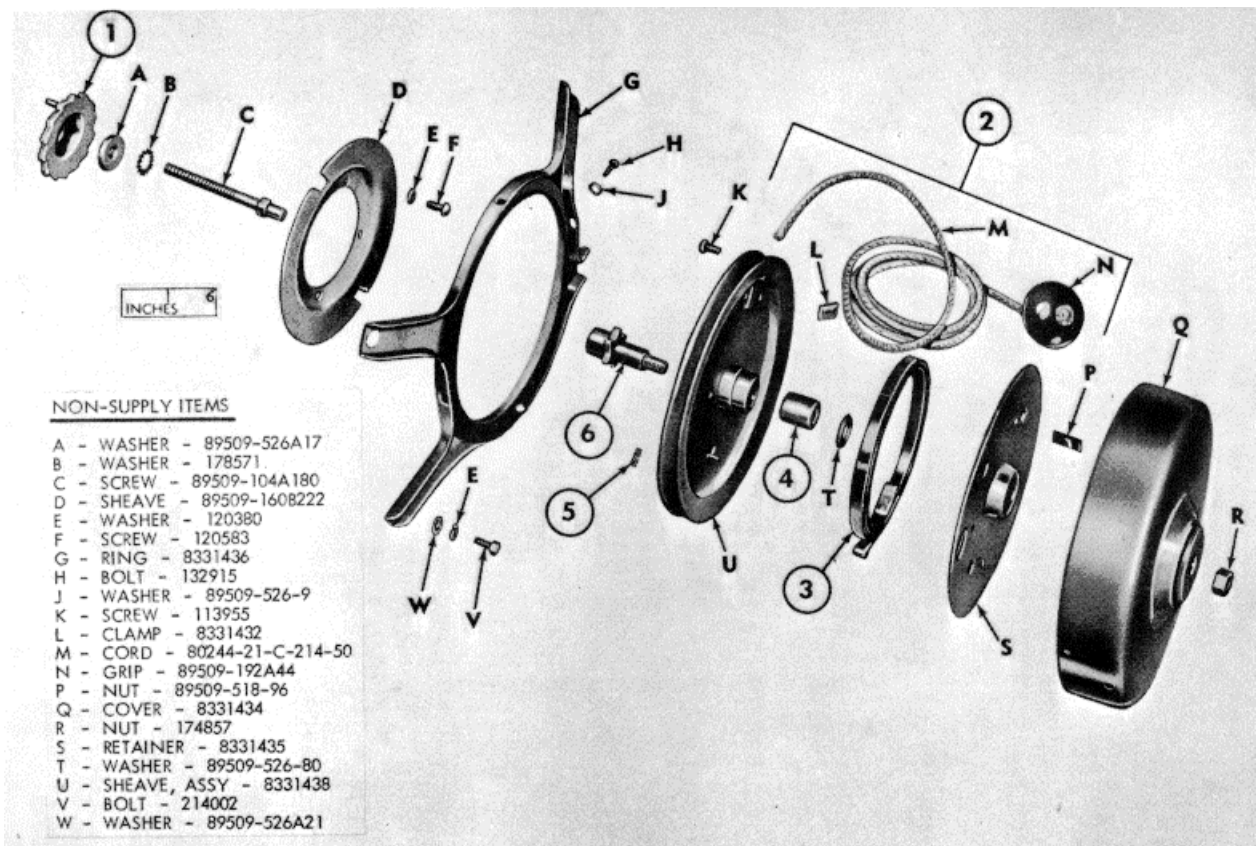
ROPE-PULL STARTER EXPLODED VIEW.
